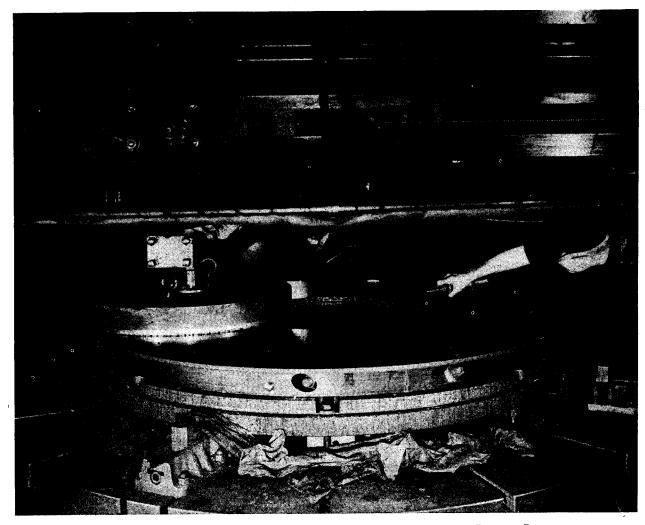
Factory View Illustrating the Method of Polishing a Thrust Bearing Runner.
